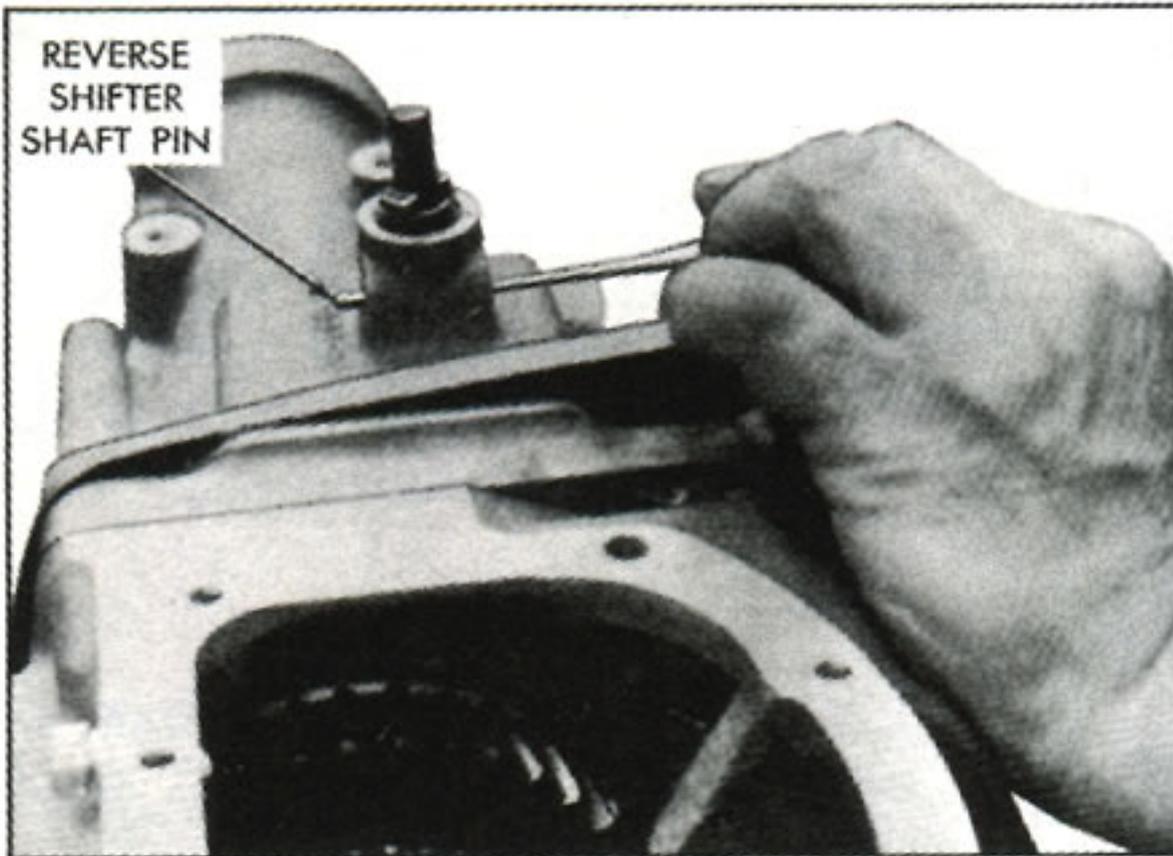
Removing Reverse Shifter Shaft Lock Pin
